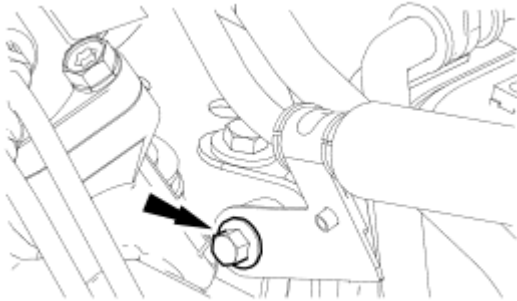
Locating Power Steering Pressure (PSP) Hose Bracket Bolt
